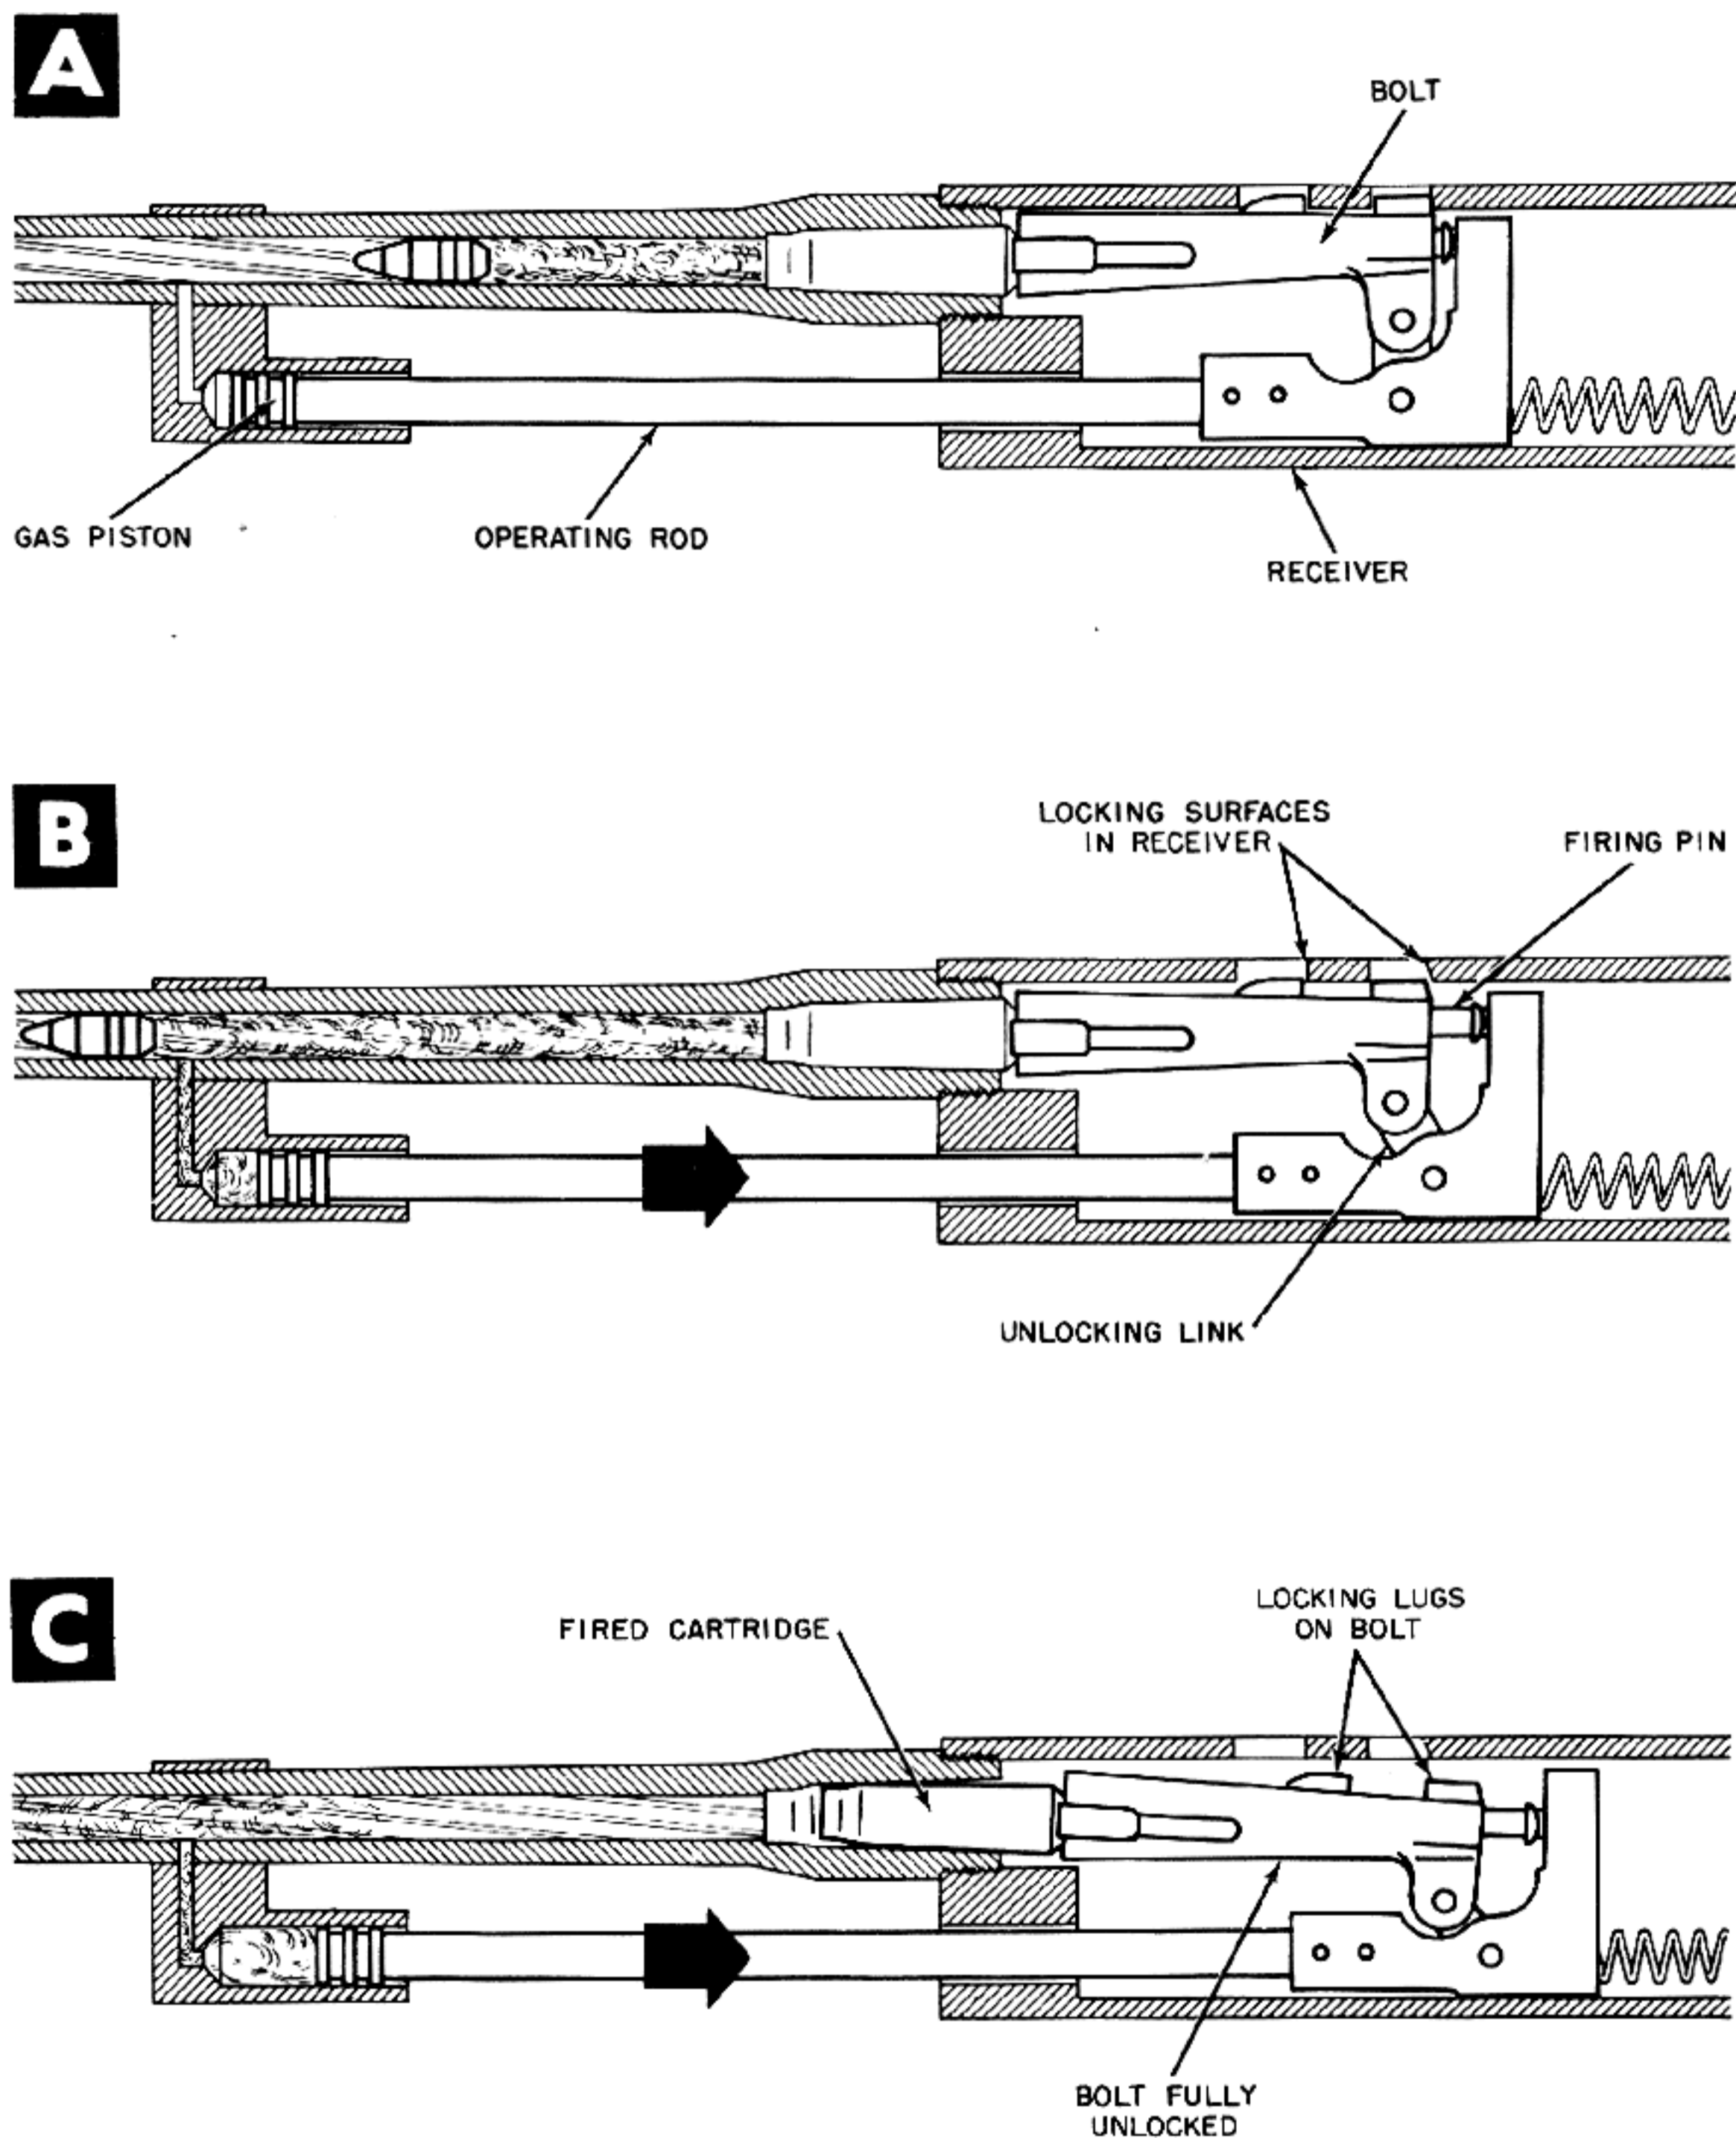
Recoiling Locking Link Pulls Bolt Free of Locking Surfaces in Receiver.
